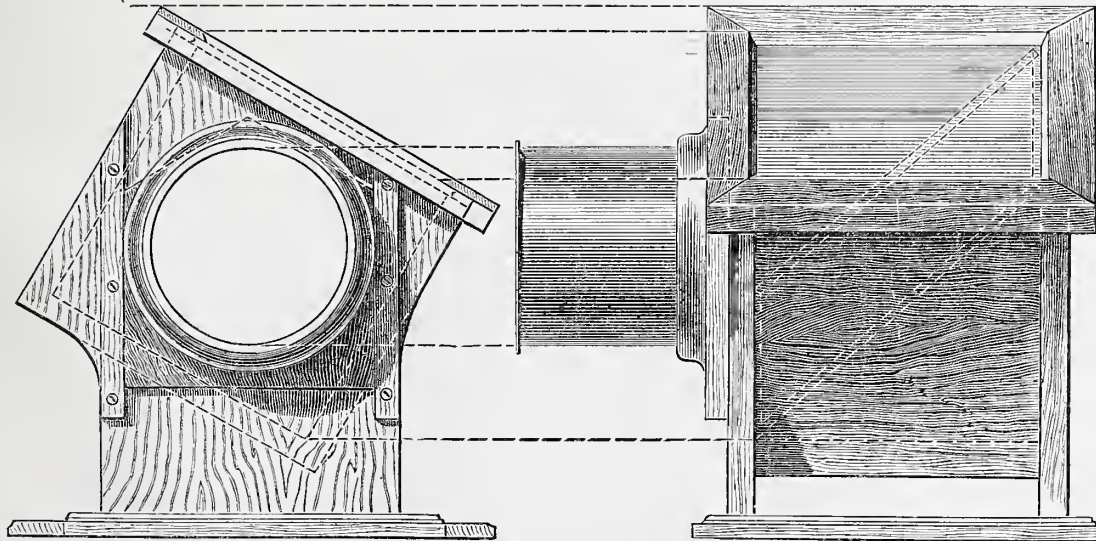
End Elevation of Camera Obscura. Fig. 16.—Front Elevation of ditto, showing Position and Angle of Mirror.
